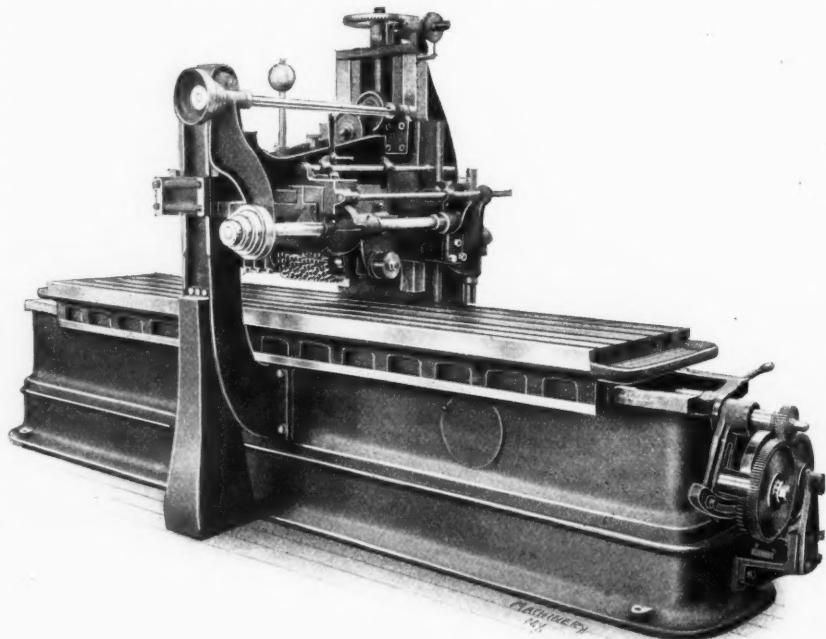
Heavy Automatic Rack-cutting Machine of the Open-side Planer Type, built by Walcott & Wood.
